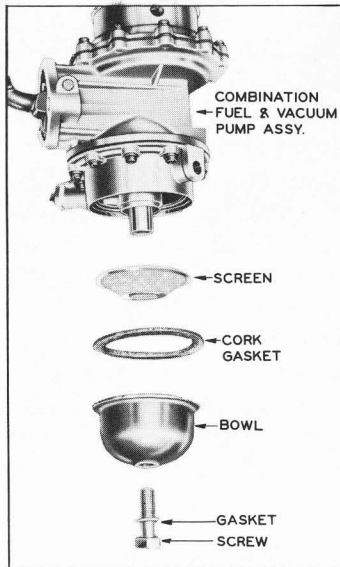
Fuel Pump Gasoline Filter—Disassembled
